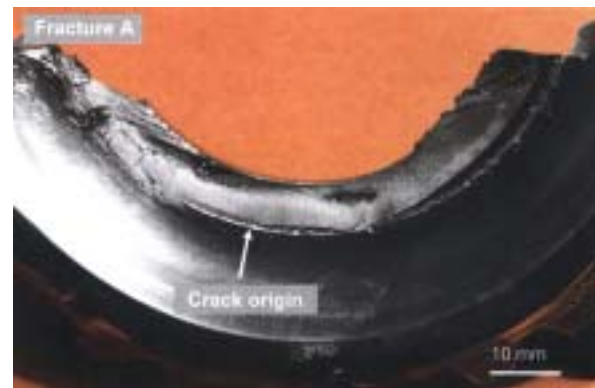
Close-up view of fracture A (refer Fig.2); note the beach marks' orientation.
